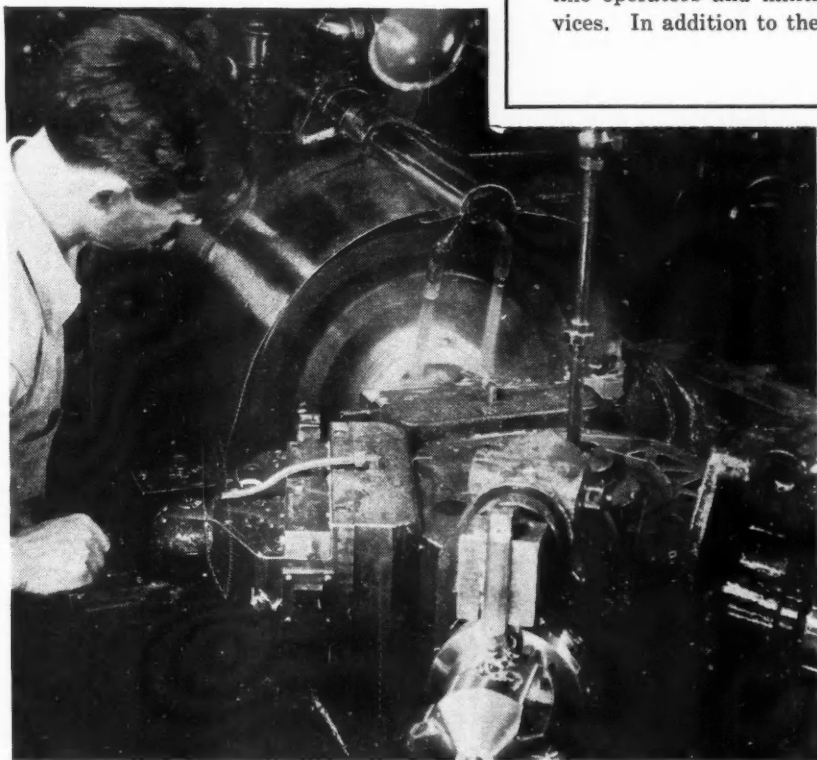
Operations performed on this Potter & Johnson machine include rough and finish bore of the cylinder head dome, turning the inside thread diameter, facing the flange, and turning the O.D. of the flange. The flange O.D. is machined to within 0.0005 in. as the flange is used for accurately locating the cylinder head in subsequent machining operations. The machine is fully automatic except that it must be loaded and unloaded by the operator. For this series of operations, the head is clamped on the O.D. of the fins and centralized on a dowel hole which is added to the casting for the purpose.
